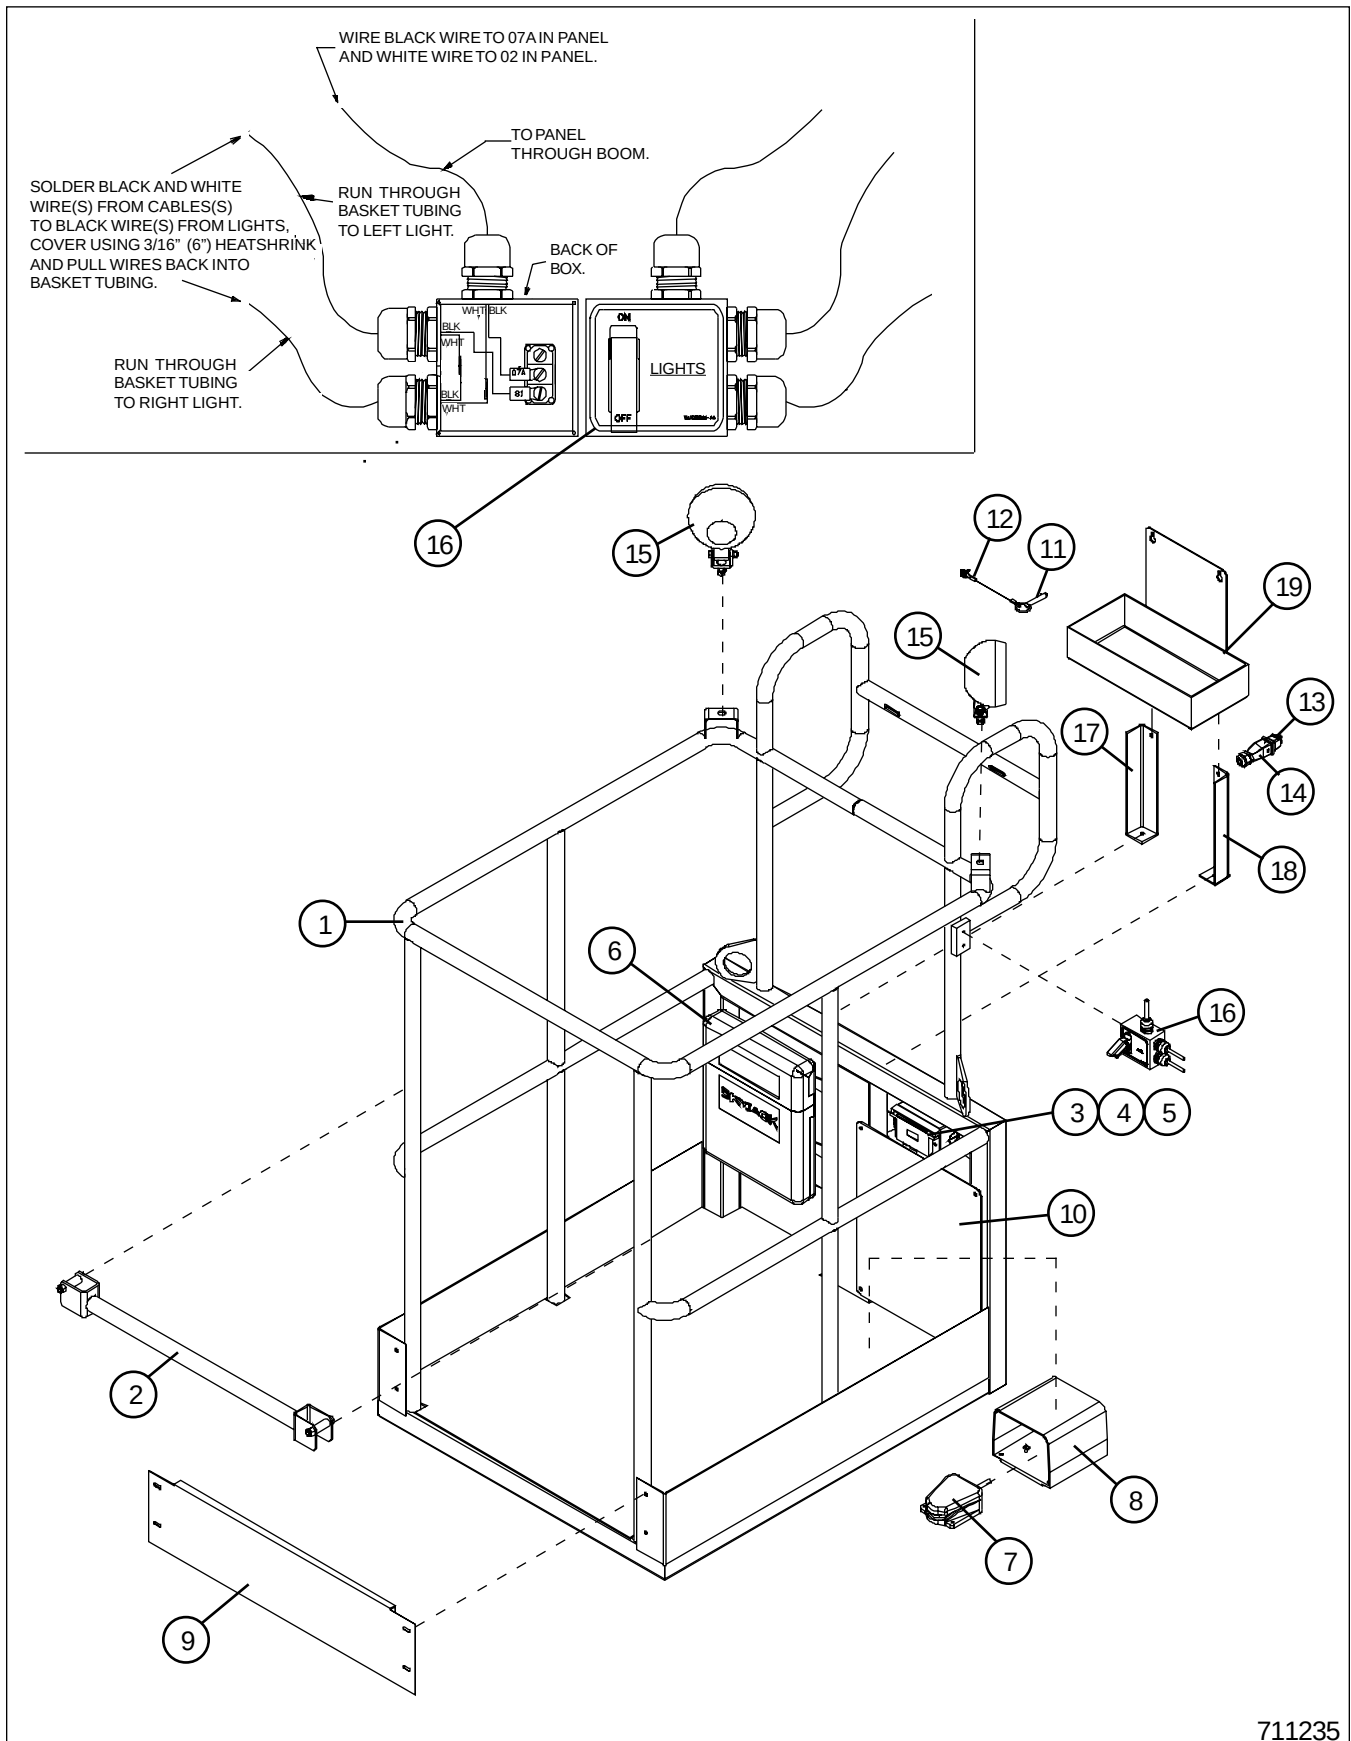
PLATFORM ASSEMBLY 36 " X 30 " WITH PLATFORM LIGHTS AND TOOL TRAY.
